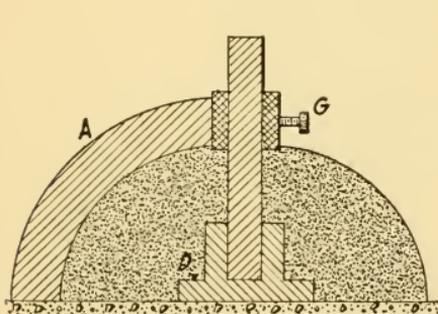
Spindle and sweep set to sweep the sand for the outside of the casting.
